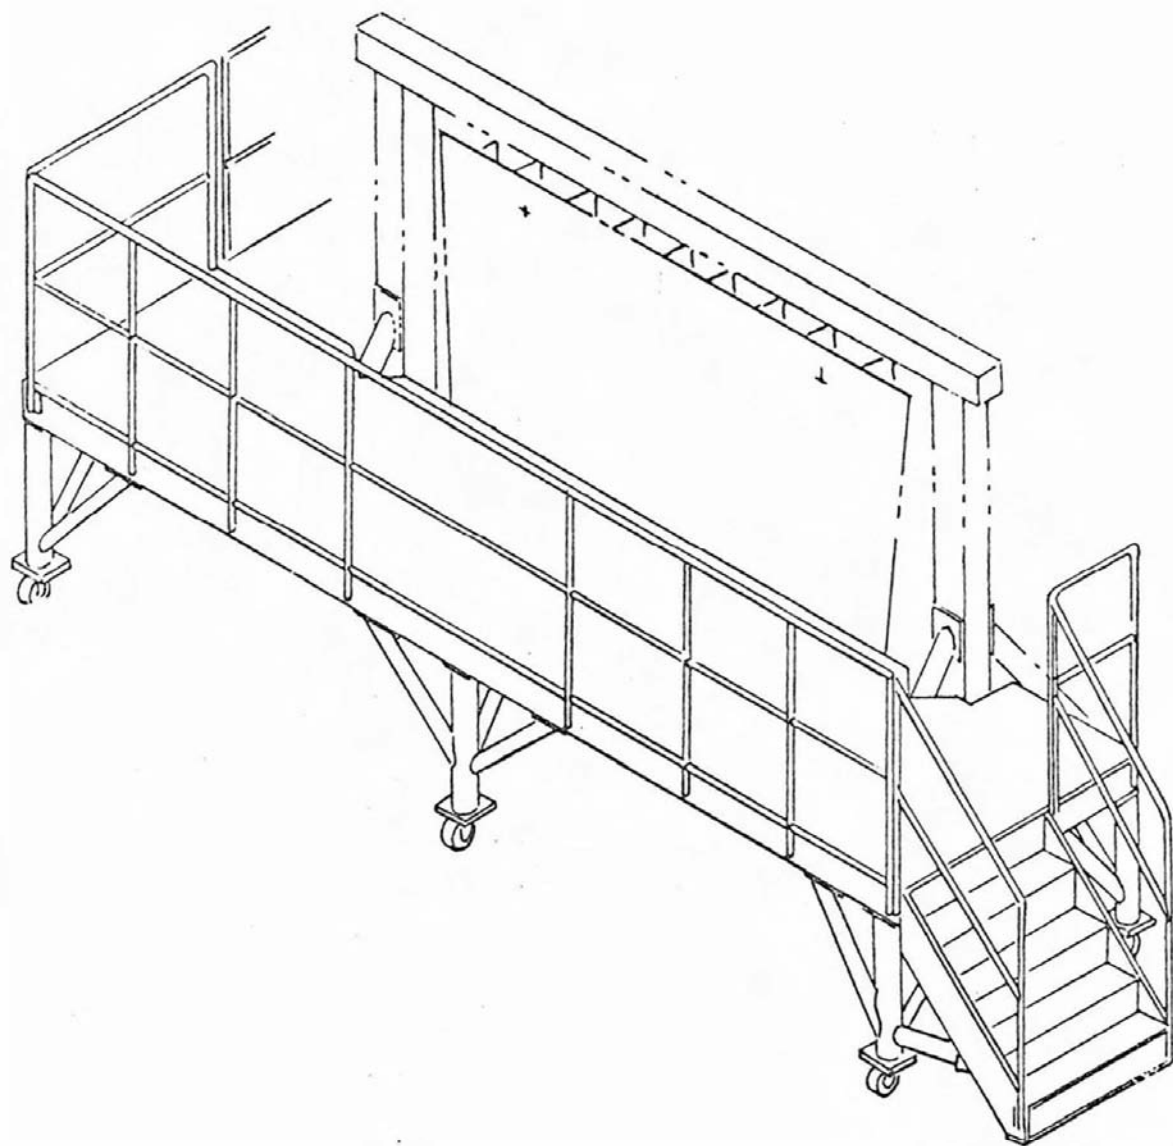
Center Engine Support Web Assemblies Personnel Platform PP-370-18901
